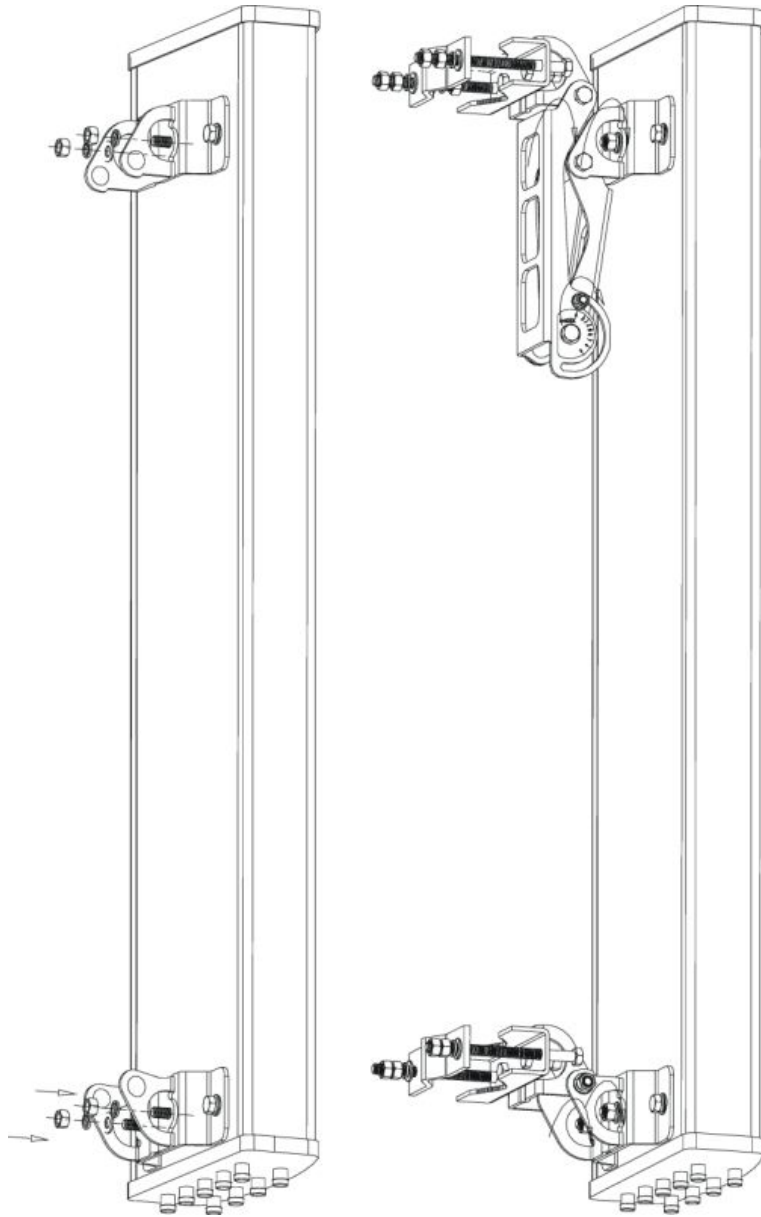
MOUNTING LOWER SUPPORTING ARM
